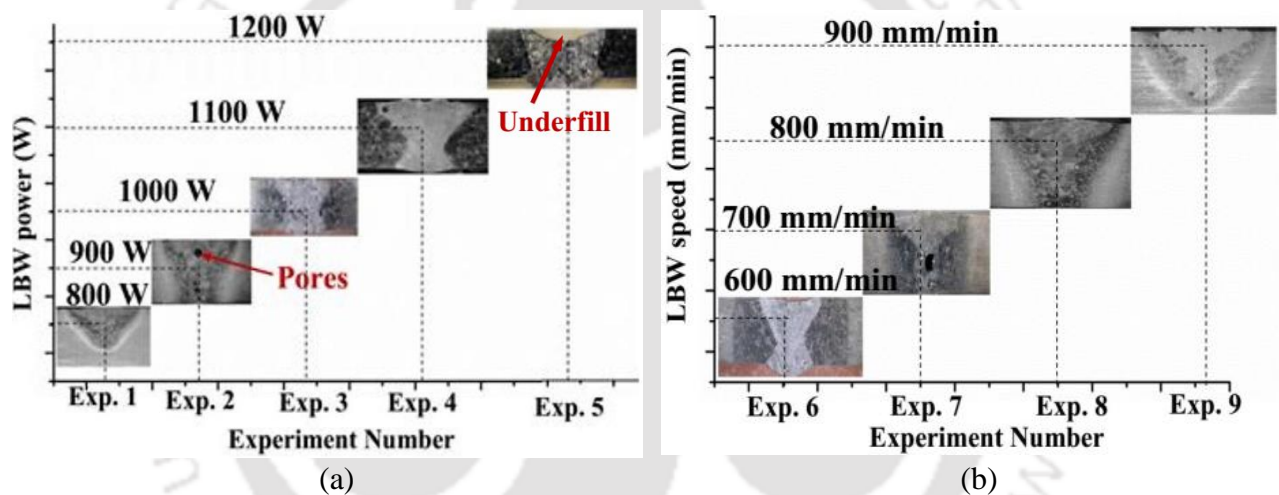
Bead geometries at different (a) beam power and (b) welding speed
